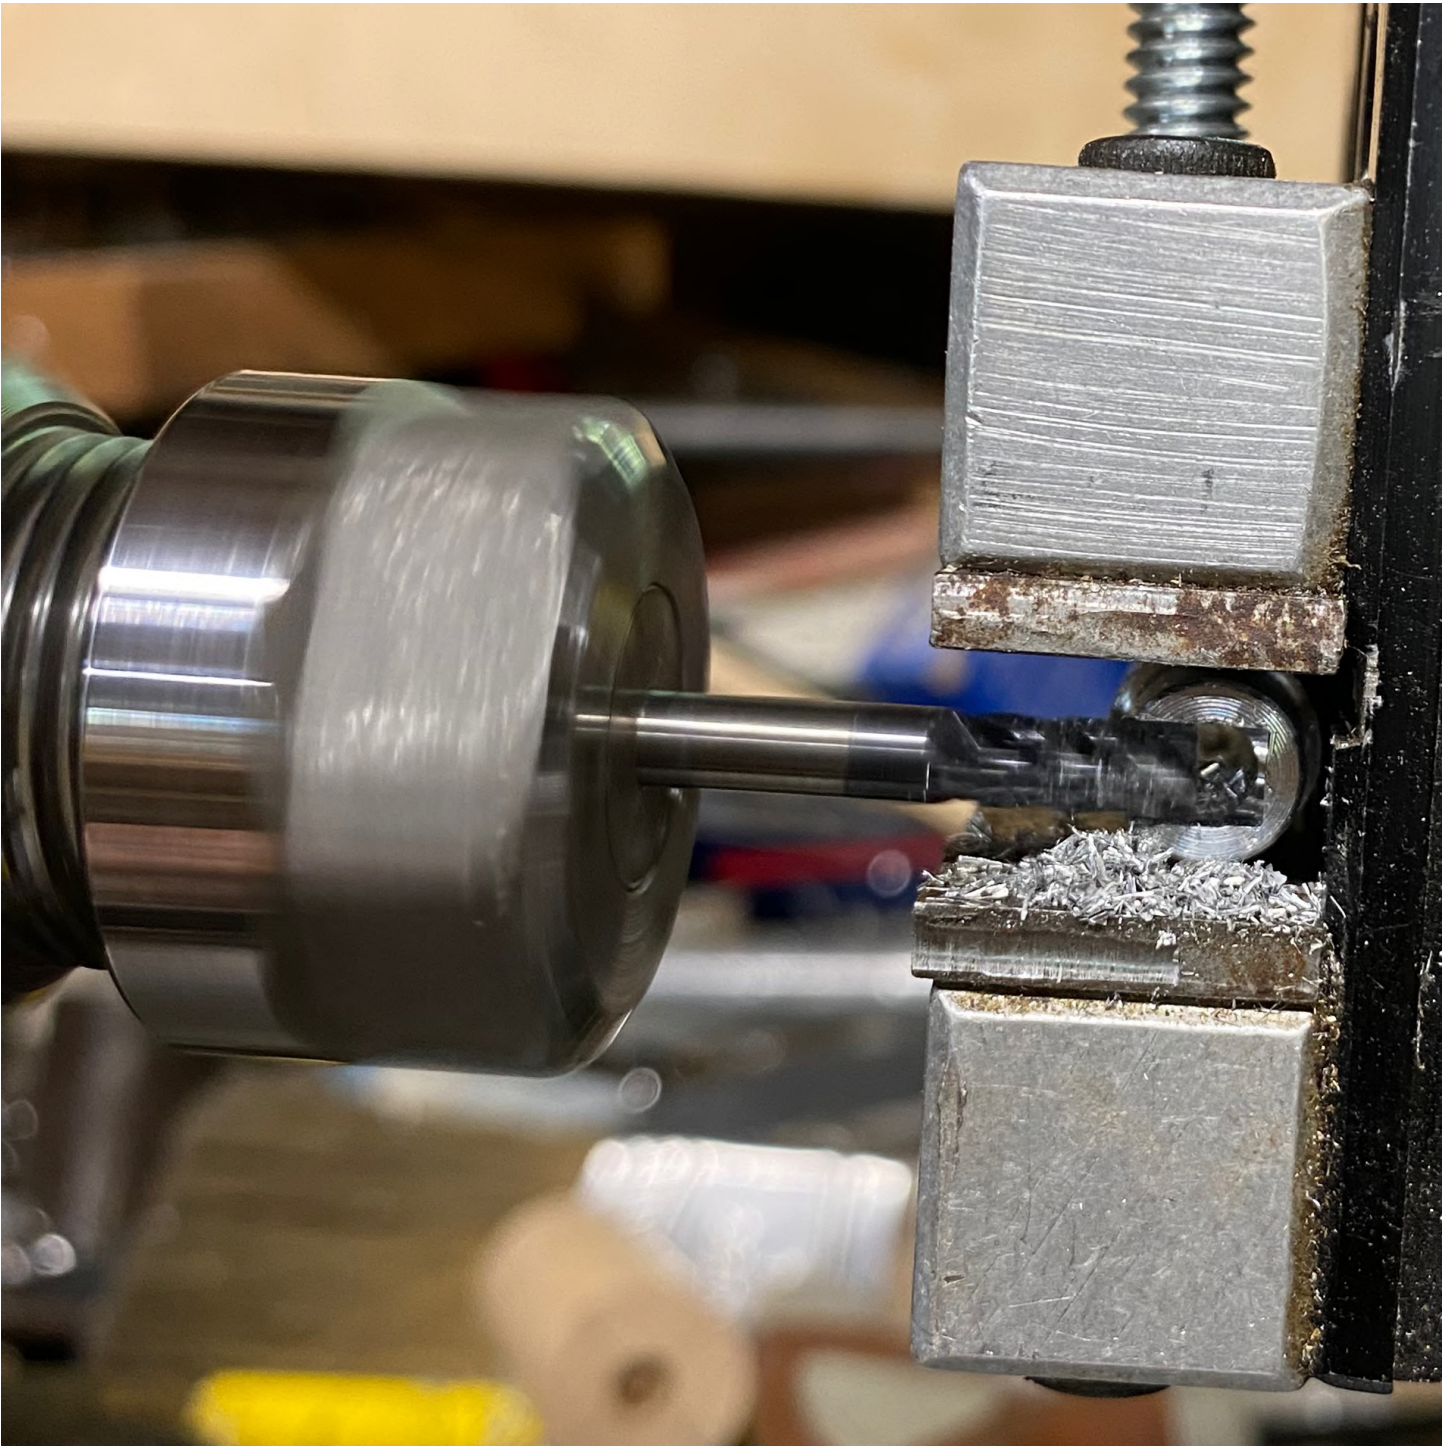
Milling the slot in the billet for the square shaft centered on the pre-drilled hole.
